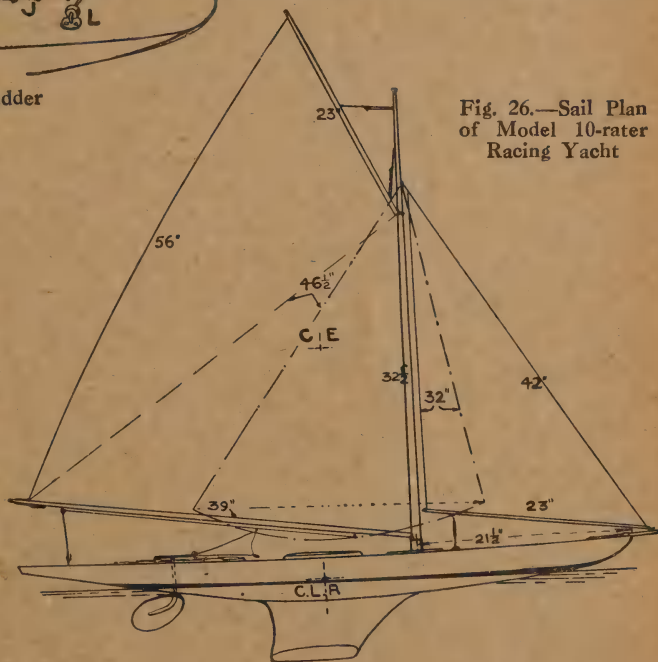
Sail Plan of Model 10-rater Racing Yacht
